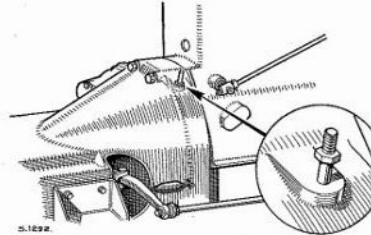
Timing plug location in the clutch housing (Inset shows the timing plug reversed for setting the pistons to T.D.C. position on number 1 and 4 cylinders)
